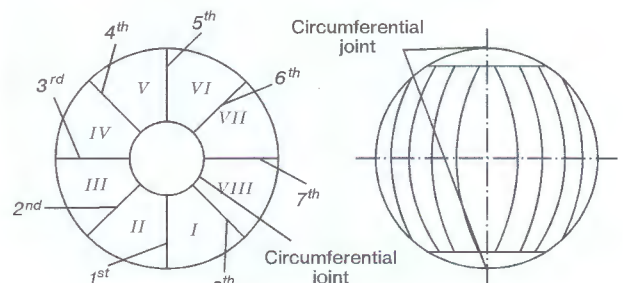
Schematic of assembly of blocks on a supporting ring: I–VIII — blocks; 1st–8th — joints
